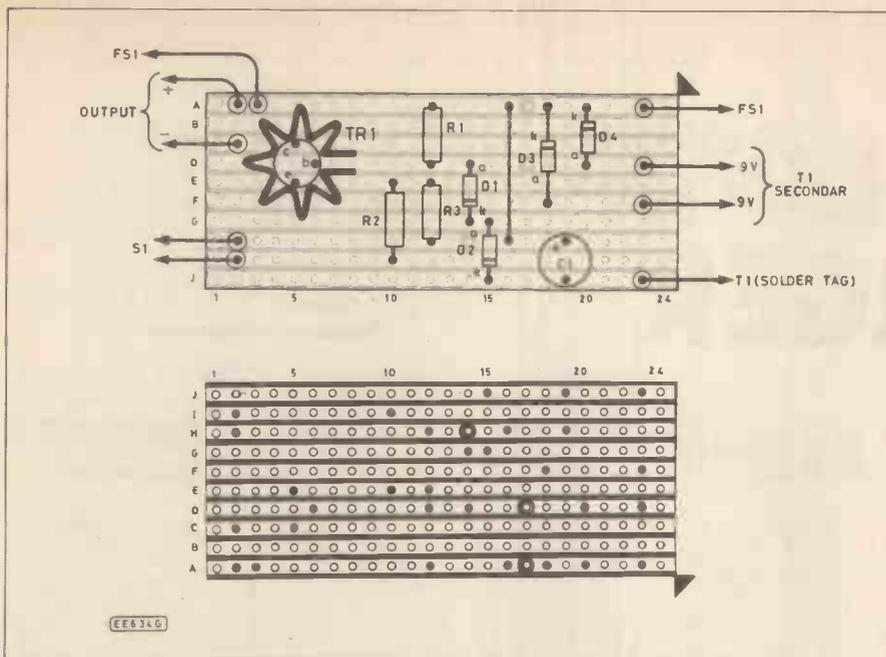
Component layout and details of breaks to be made in the underside copper strips of the stripboard for the mains hand lamp charging system.
